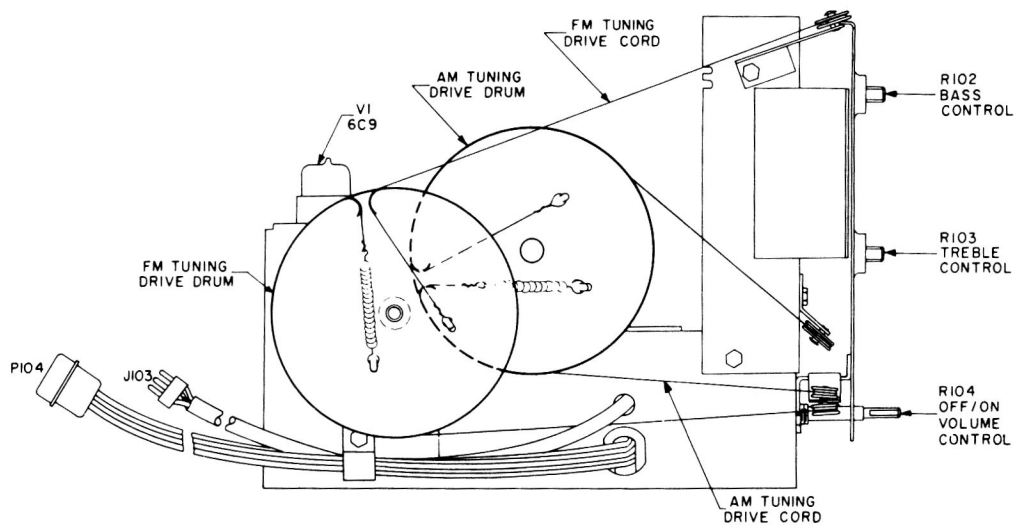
Left Side View of Chassis Showing Drive Drums
